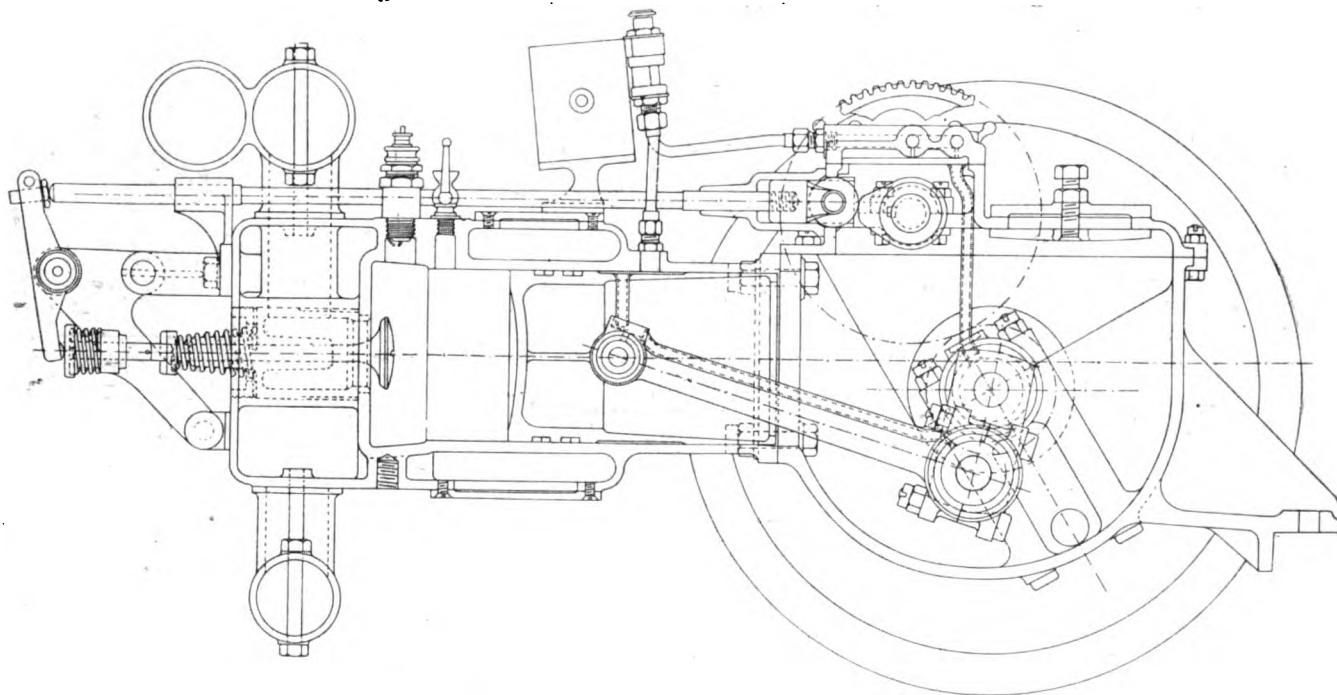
Sectional View of Duryea Motor with Offset Crank Shaft.
